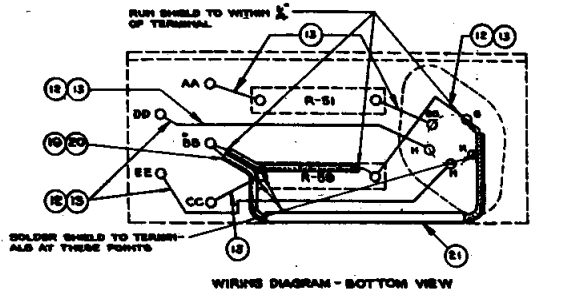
Vacuum tube keyer unit wiring diagram (bottom view) and flexible lead details.
